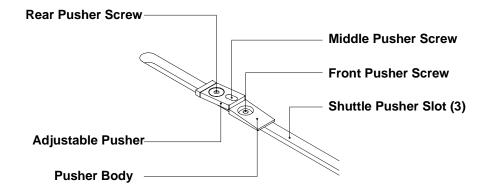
Rear pusher details indicating the location of the various adjustment points.
